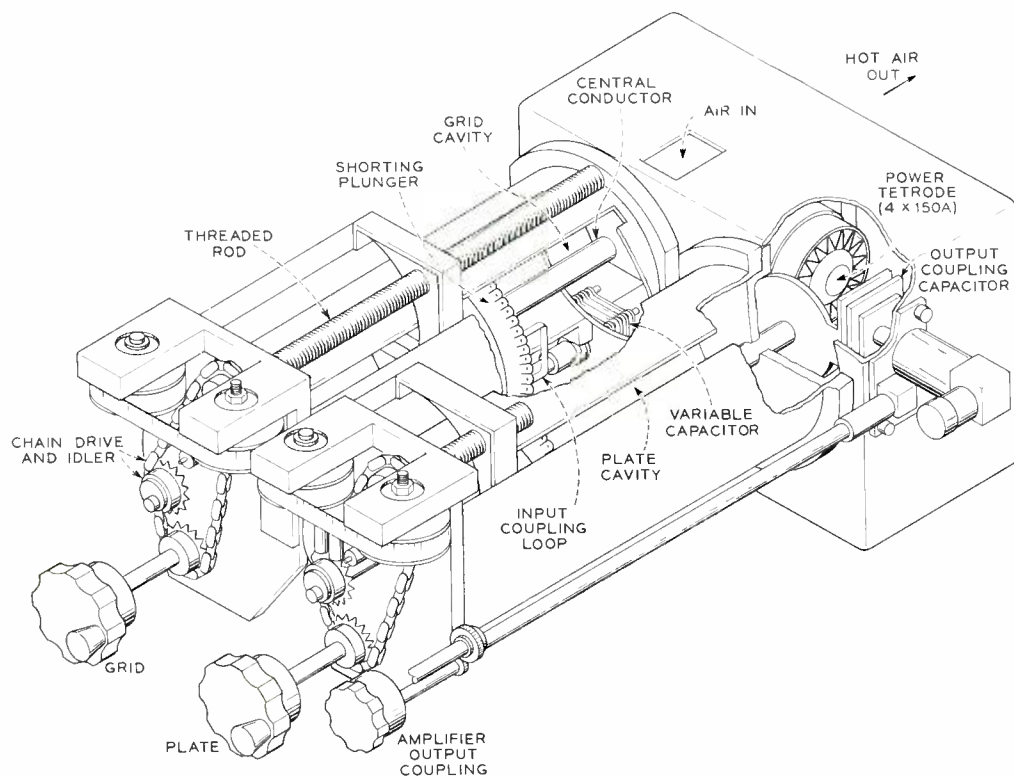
Cutaway drawing of the 100- to 225-mc tuning unit, showing positions of coaxial cavities, power tube, and other components.
